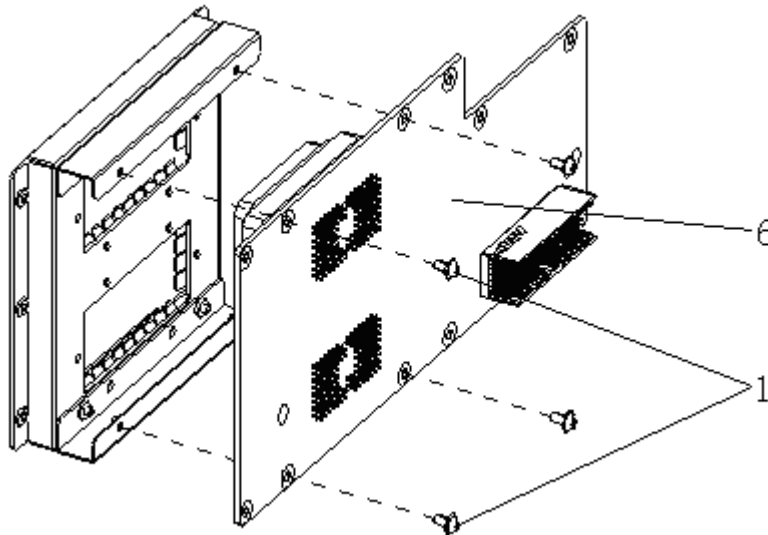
Sketch Map of Probe Board and Main Board Disassembly (7)
